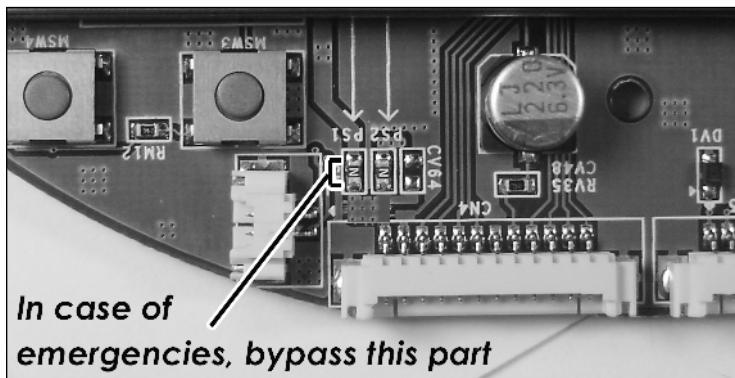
The fuse that you can bypass, labeled PS1 on the board.
